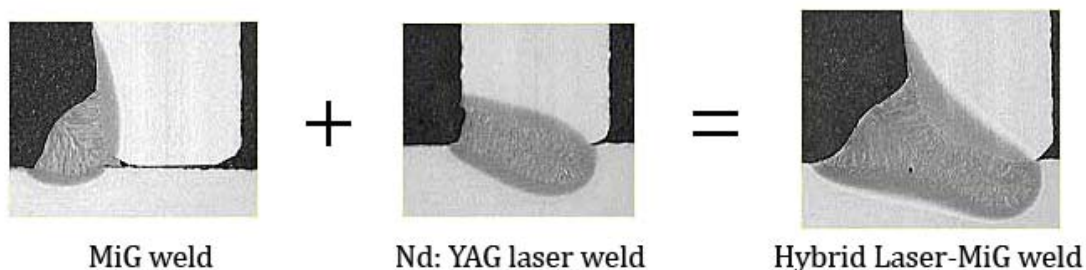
A metallographic cross-section of a laser-hybrid weld.
